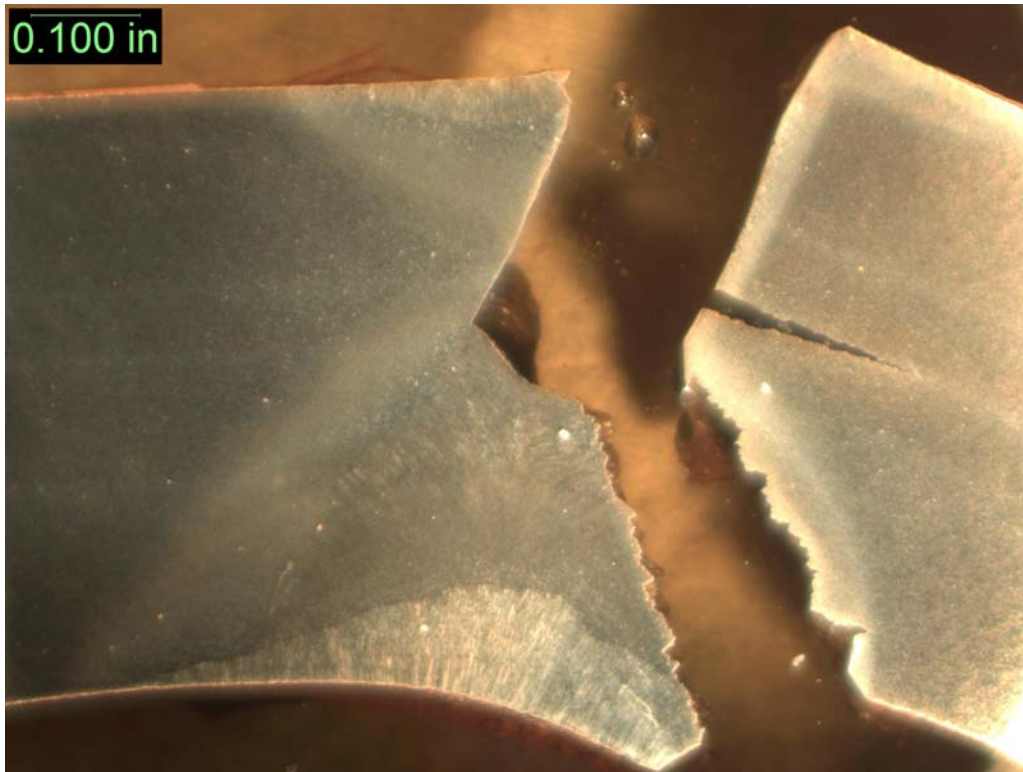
Lack-of-fusion area cross-section from Fracture 2. Note crack at root of weld running parallel to surfaces. Etch: 2% nital.
